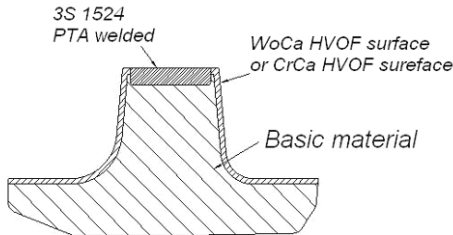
Completely armoured screw: flight welded, faces coated
